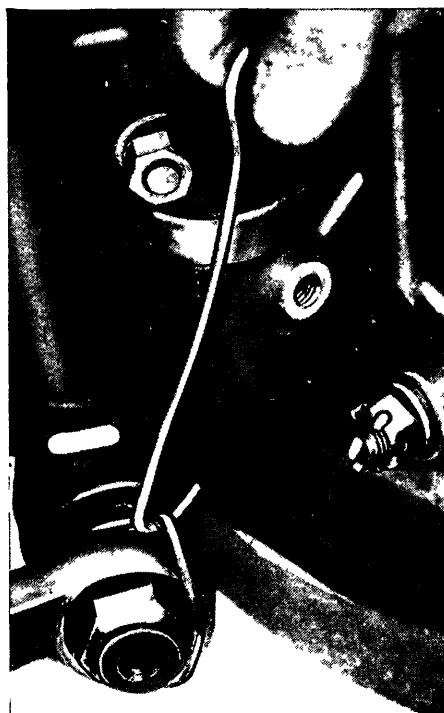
Positioning seal at lower pivot pin. 1939-48
